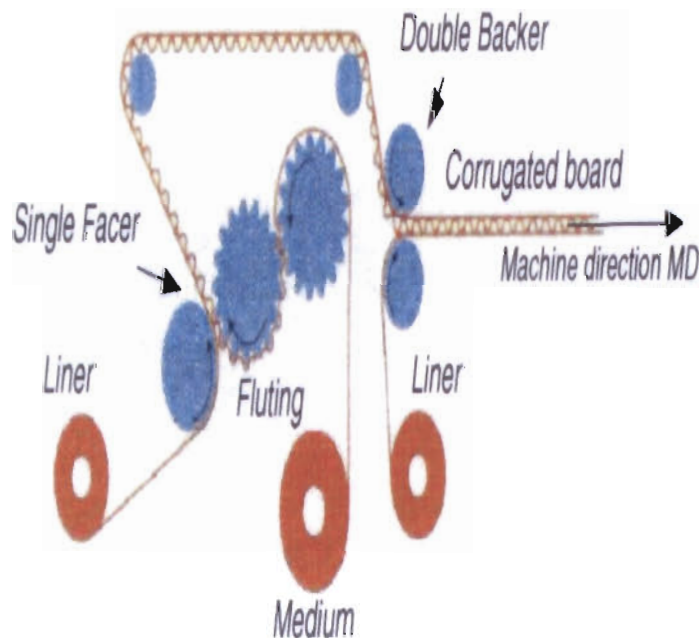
The complete manufacturing process of corrugated board that is performed by the Corrugator [5].
